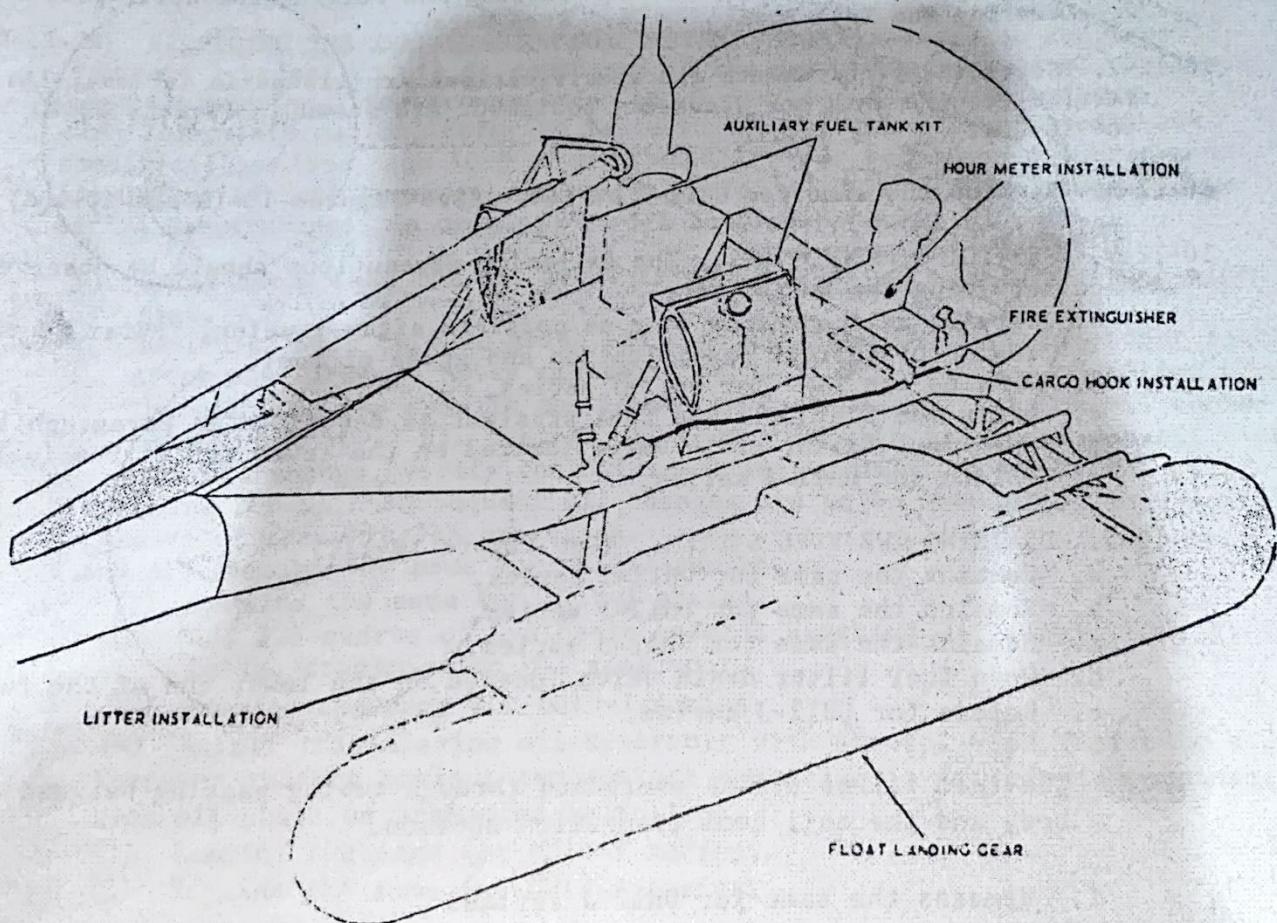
(560). Accessory Equipment (Sheet 2 of 2)
